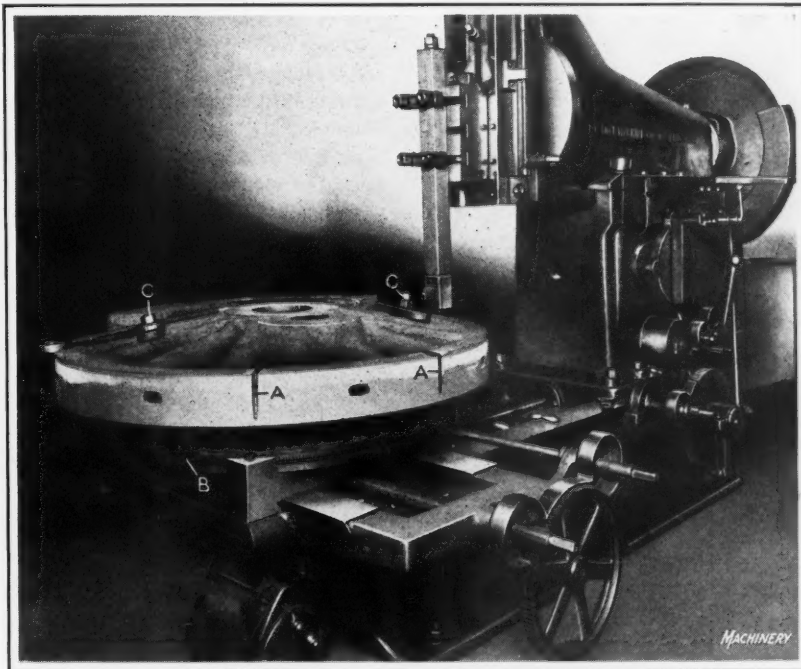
Slotting out Cored Shrinkage Relief Openings in a Locomotive Wheel Rim
